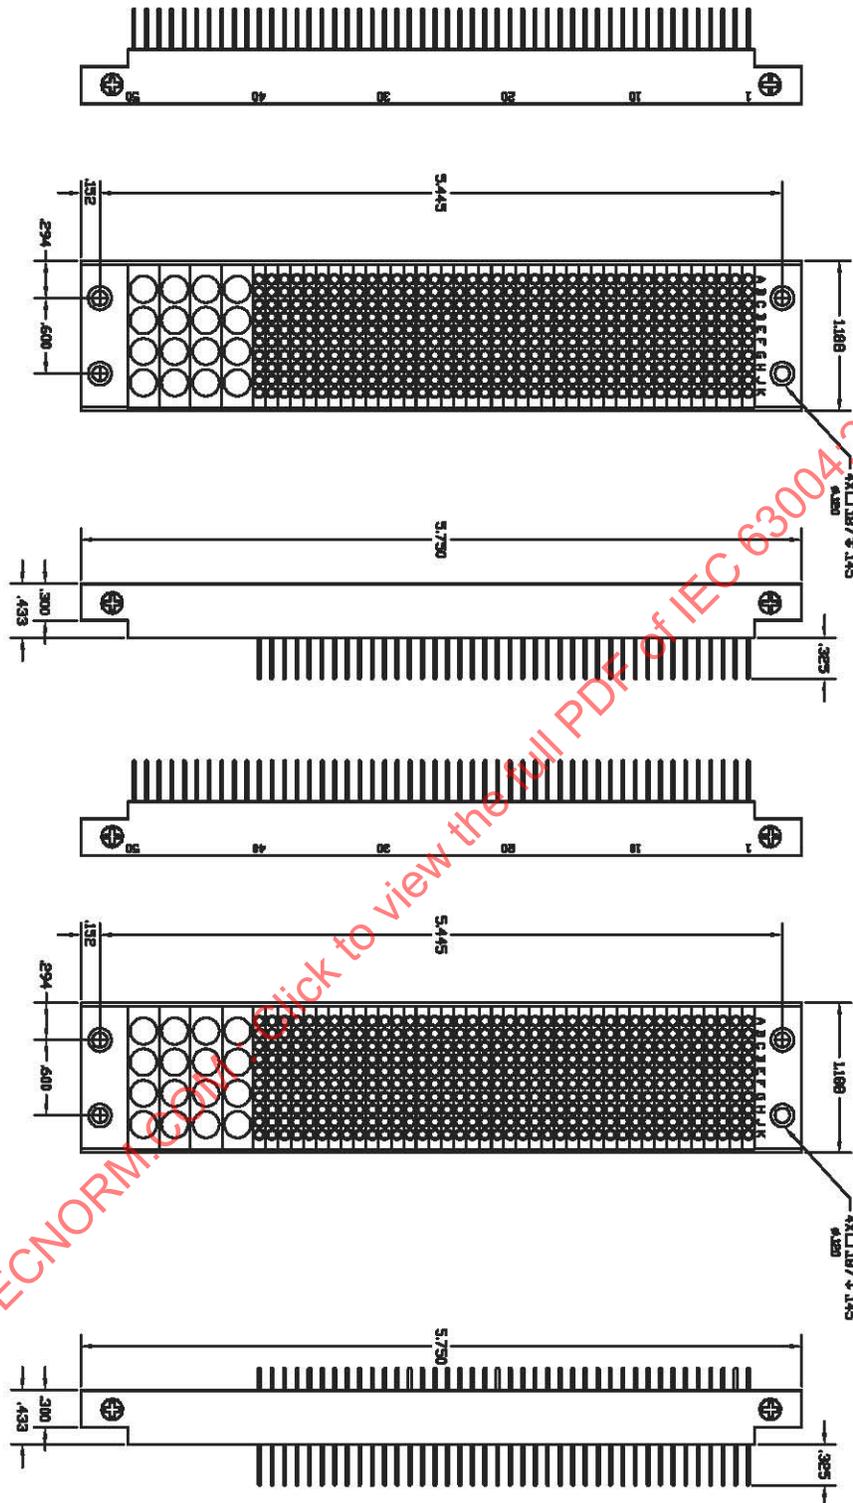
Mixed circular-post signal and size 18 (i.e., coax/power) module connector assembly dimensional specifications
